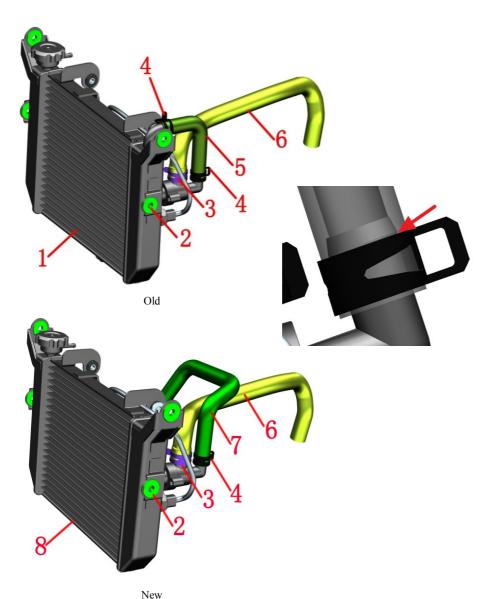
COOLING SYSTEM COMPONENT		Main water tank assembly 2	CHK	(0)
